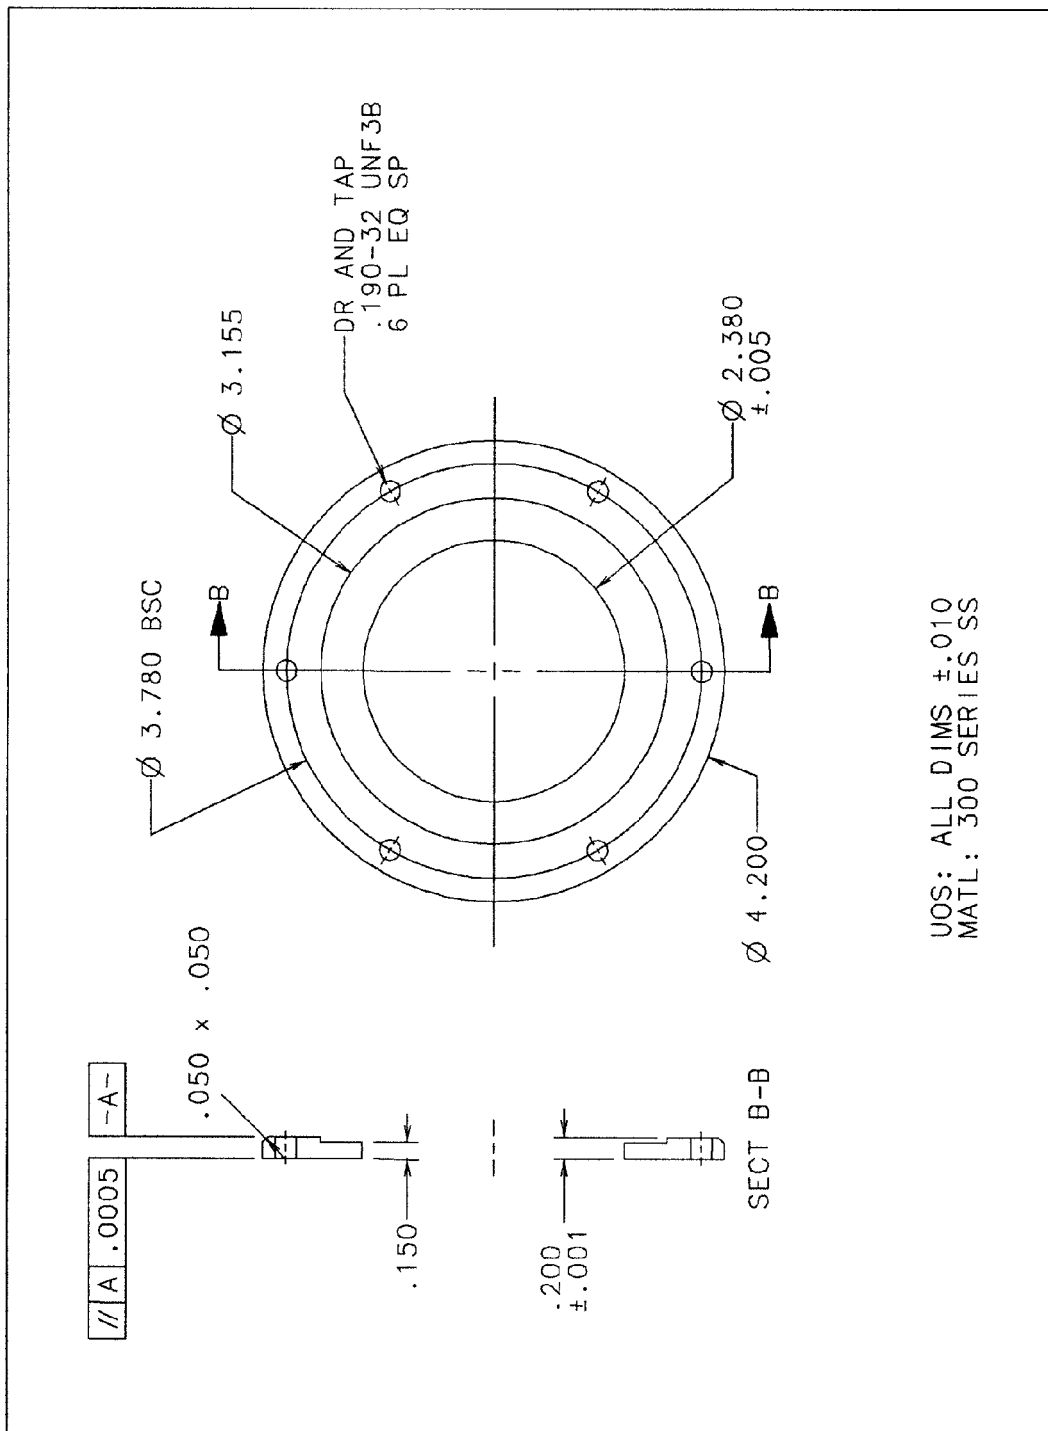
Clutch Inspection Fixture 1 (PN 63001010)
